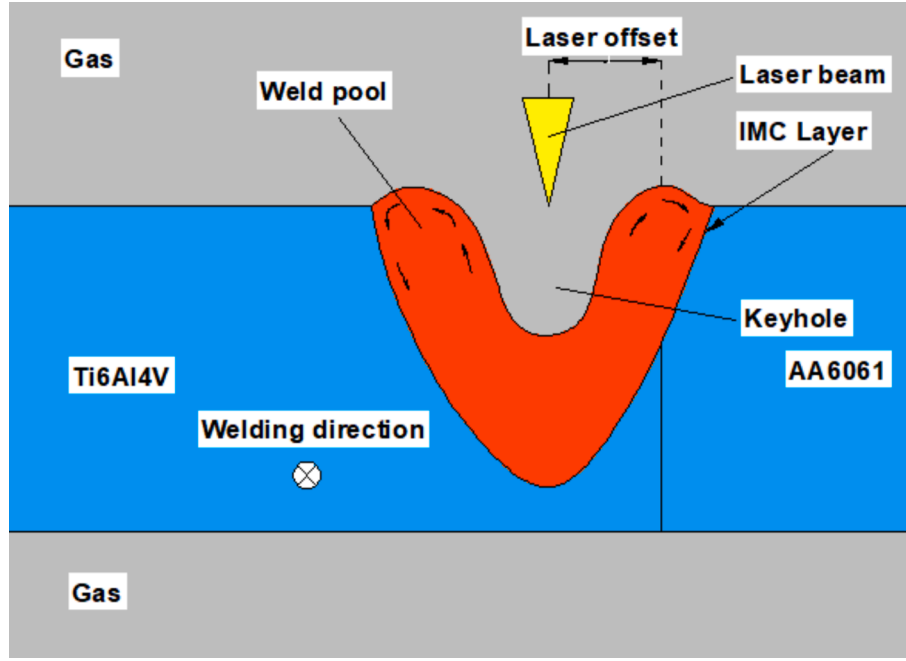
Schematic diagram of welding Ti6Al4V titanium alloy and 6061 aluminum alloy under laser offset welding.
